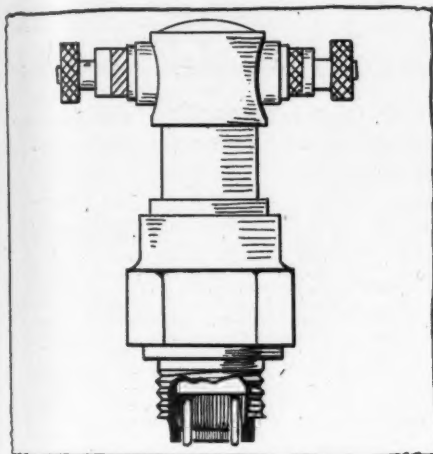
SUPERIOR DOUBLE-POINT PLUG
